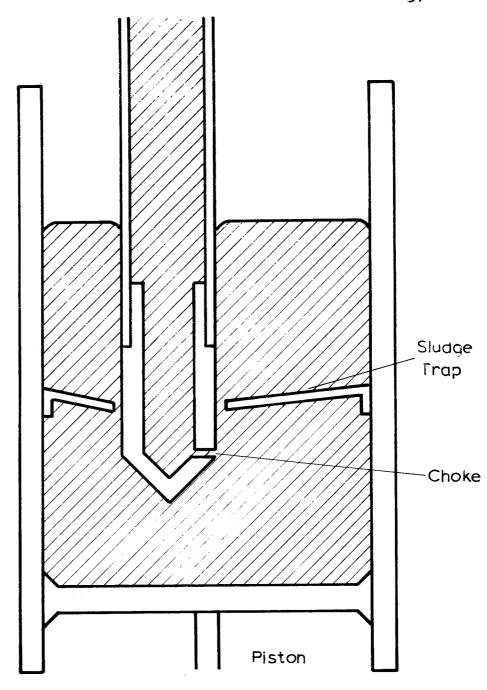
DETAILS OF SLUDGE TRAP AND CHOKE
